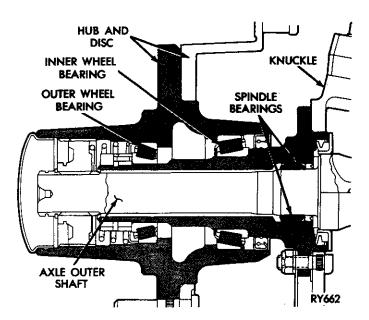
Front Wheel and Spindle Bearings 4WD Vehicles
